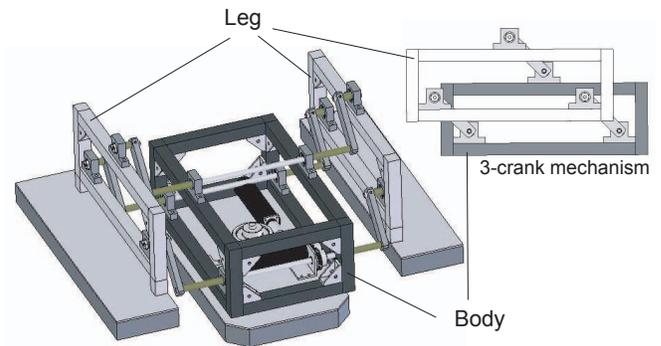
Surface-contact-type locomotion mechanism Blade Walker
